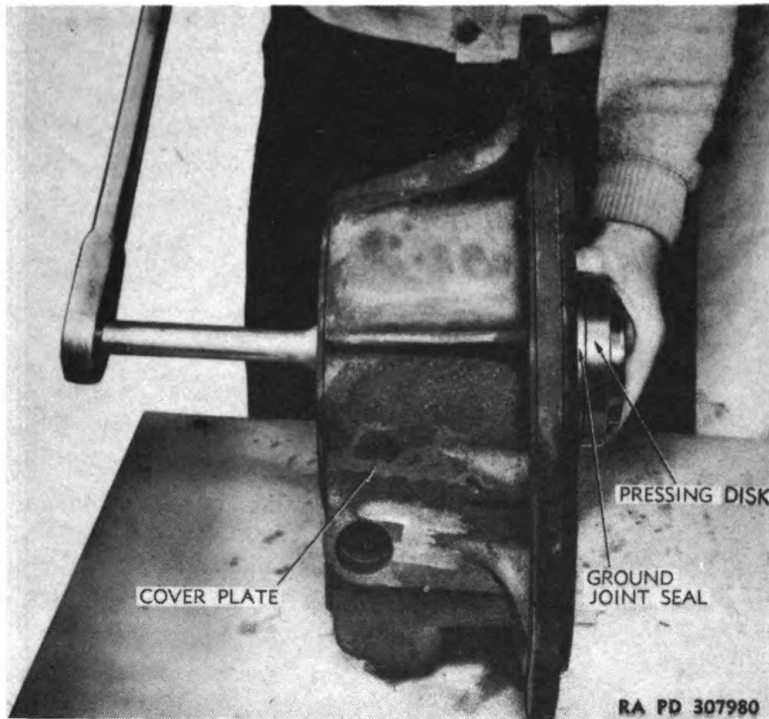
Pressing Seal Into Converter Coverplate, Using Replacer 41-R-2393-750
